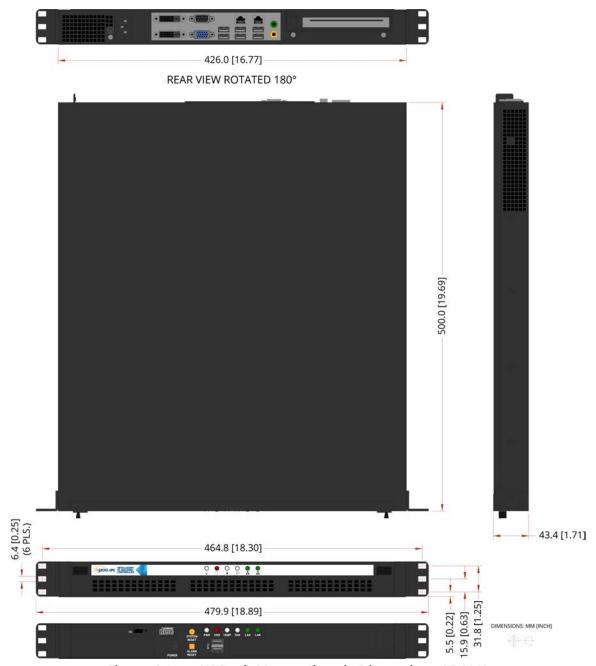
1U Rack Mount Chassis Dimensions (-R103)
